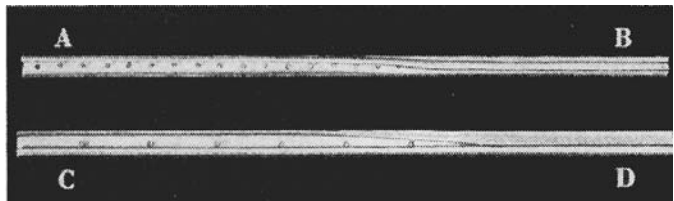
Top: Roof crown moulding with cap open at A and swaged down at B. Bottom: Roof drip moulding with cap open at C and swaged at D.
